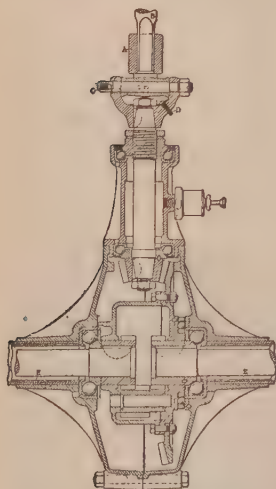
Sectional diagram of bevel gears for a shaft drive, showing arrangement of the propeller shaft and location of the thrust bearings.
